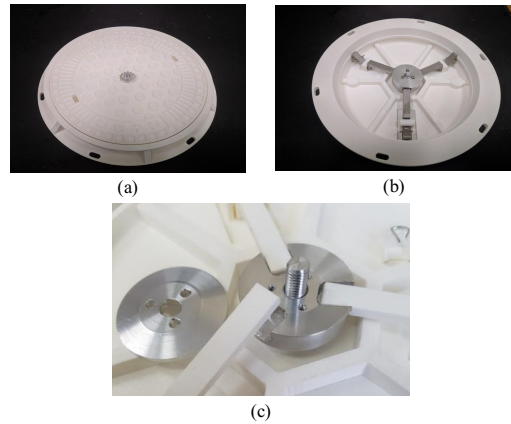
Assembled 3D printed model (scale 43:1) (a) face view (b) bottom view (c) detailed view of assembled parts
